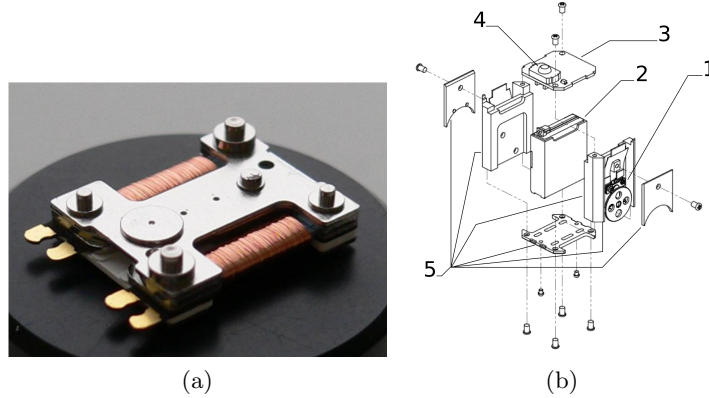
On the left a close-up picture of the step motor, on the right an exploded view of revealing the robot parts.
